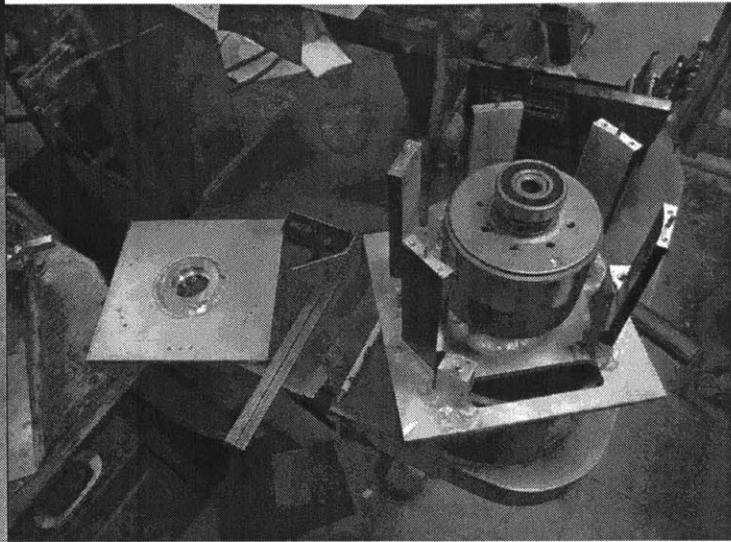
Removing the unsealed bearings      Figure 20: magnetic dust on the rotor
